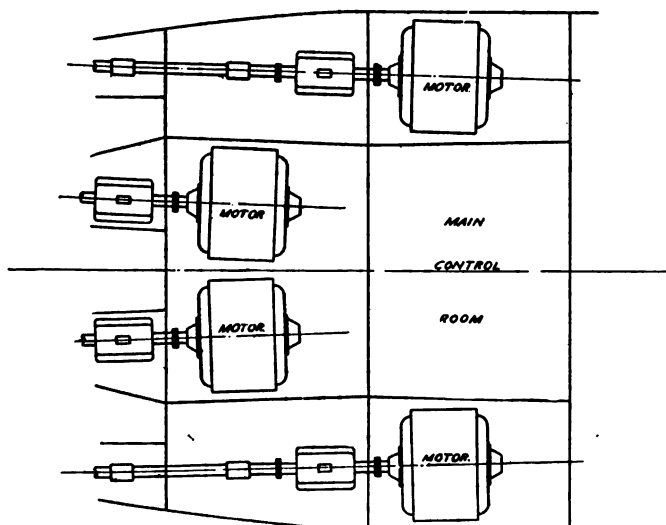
BATTLESHIP MACHINERY ARRANGEMENT; DIAGRAMMATIC PLAN OF ELECTRIC DRIVE SHOWING ARRANGEMENT OF MOTORS.
